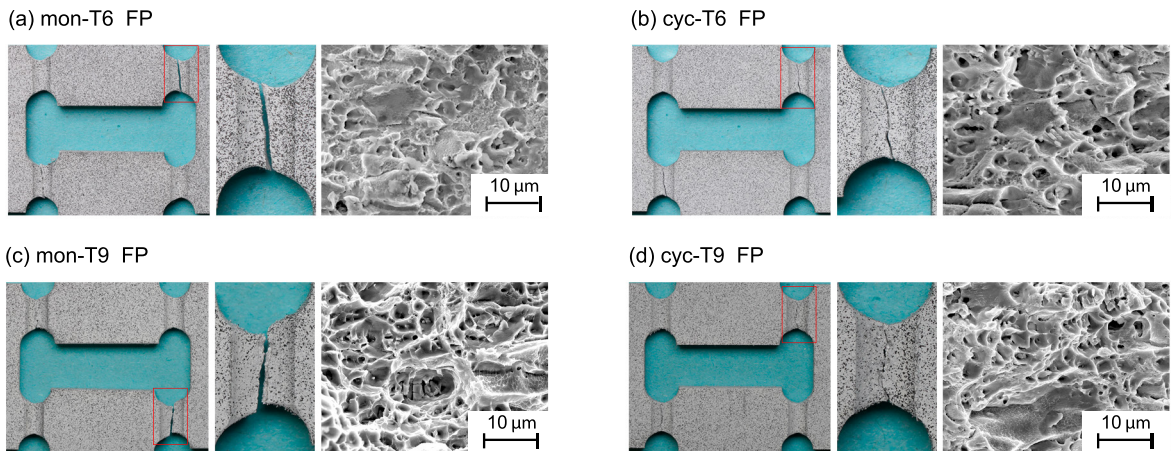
Fracture pictures taken from the notch surfaces and SEM pictures taken from the fractured notched cross-sections (FP = fracture point).
